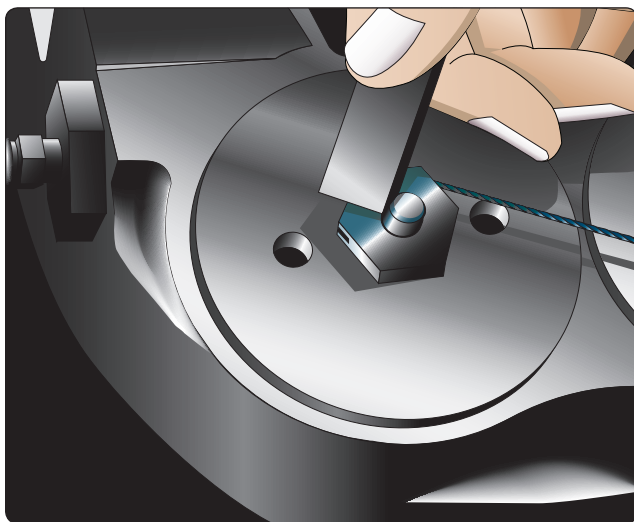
Brake lining wear on a Goodyear brake is ascertained by measuring the wear pin of the automatic adjuster.
